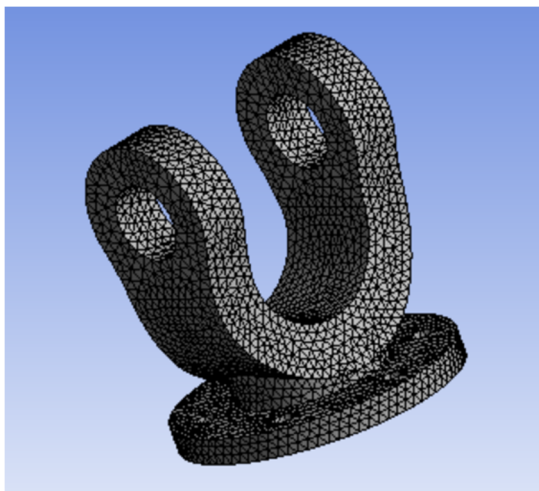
Mesh Partitioning of the Drive Shaft Flange Fork
